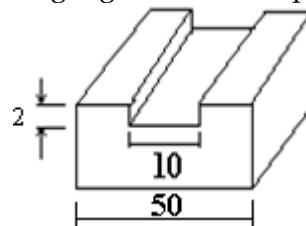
Machining horizontal, vertical & Angular surface on Shaper machine.
